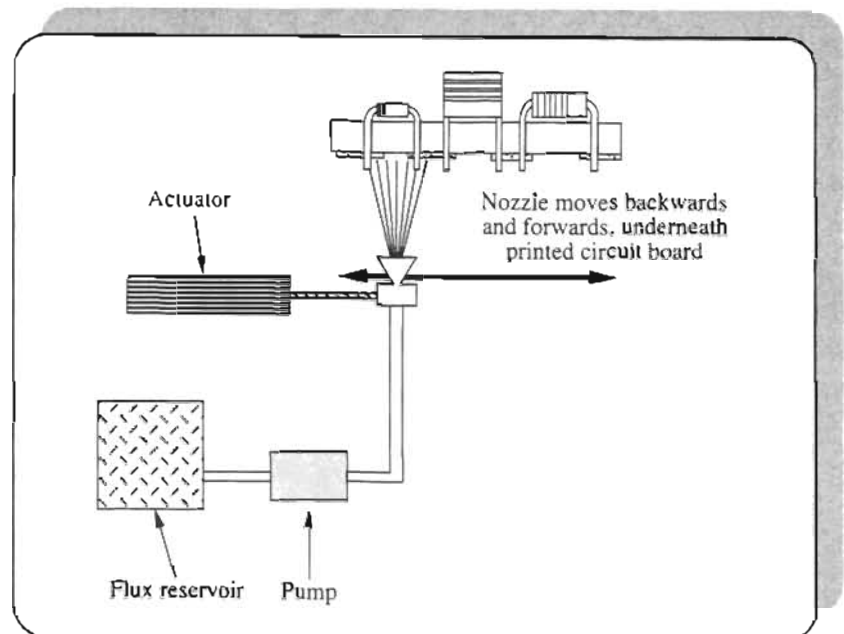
Spray fluxing, using a single moving compressed air nozzle
